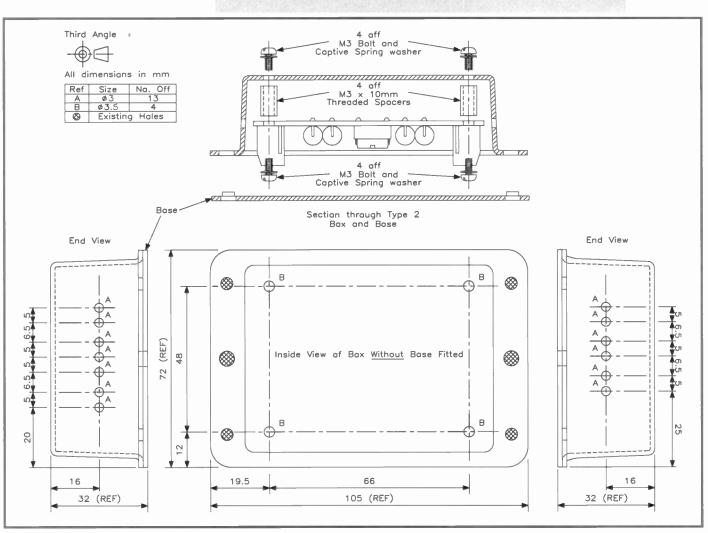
Car Lamp Monitor box drilling details and exploded assembly.
